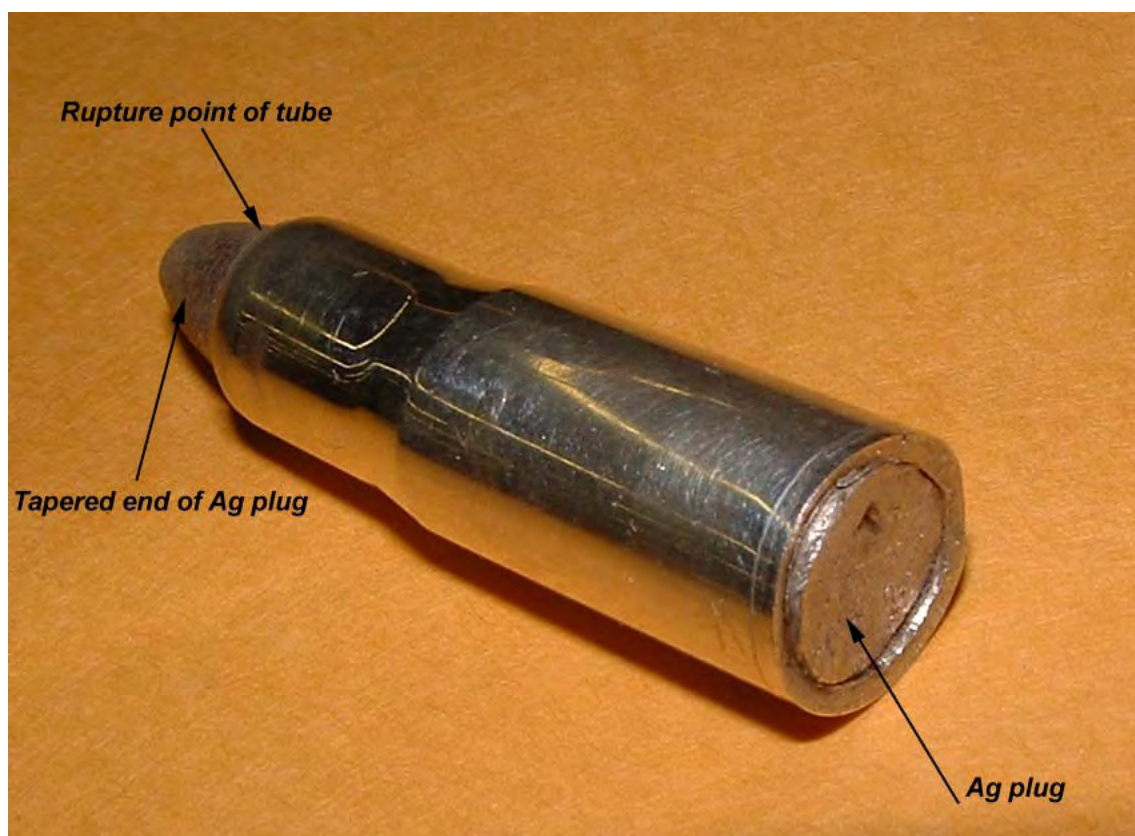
Ruptured part of the powder-filled-tube at very early stage of drawing operation. It shows *dead annealed pure-silver-plug with tapered end* as inserted in the tube for sealing. This tube failed during drawing operations just at the (ending) border of the taper, indicated by arrow. The length of the whole part is ~ 2.5 cm and the largest diameter is 10 mm in this picture.
